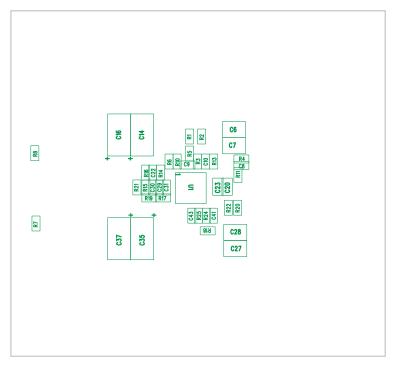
TPS40322EVM-074 Bottom Assembly Drawing (bottom view)
